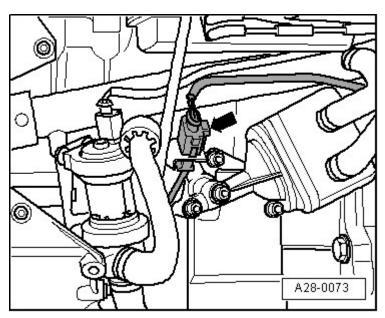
Accessory Assembly Bracket Bolts & After-Run Coolant Pump V51 Electrical Harness Connector
